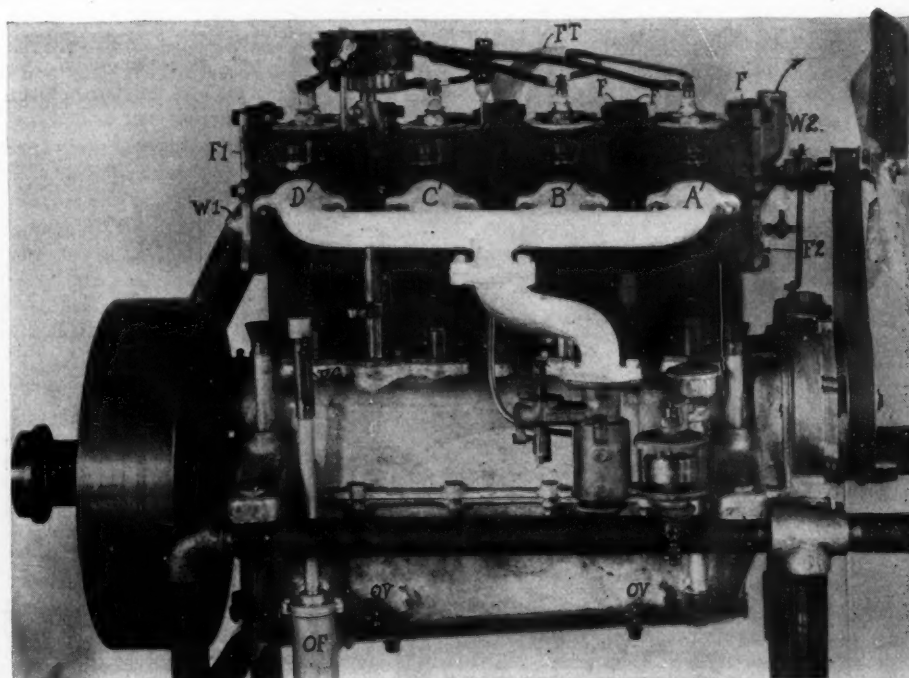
INTAKE SIDE OF PULLMAN FOUR-CYLINDER MOTOR
